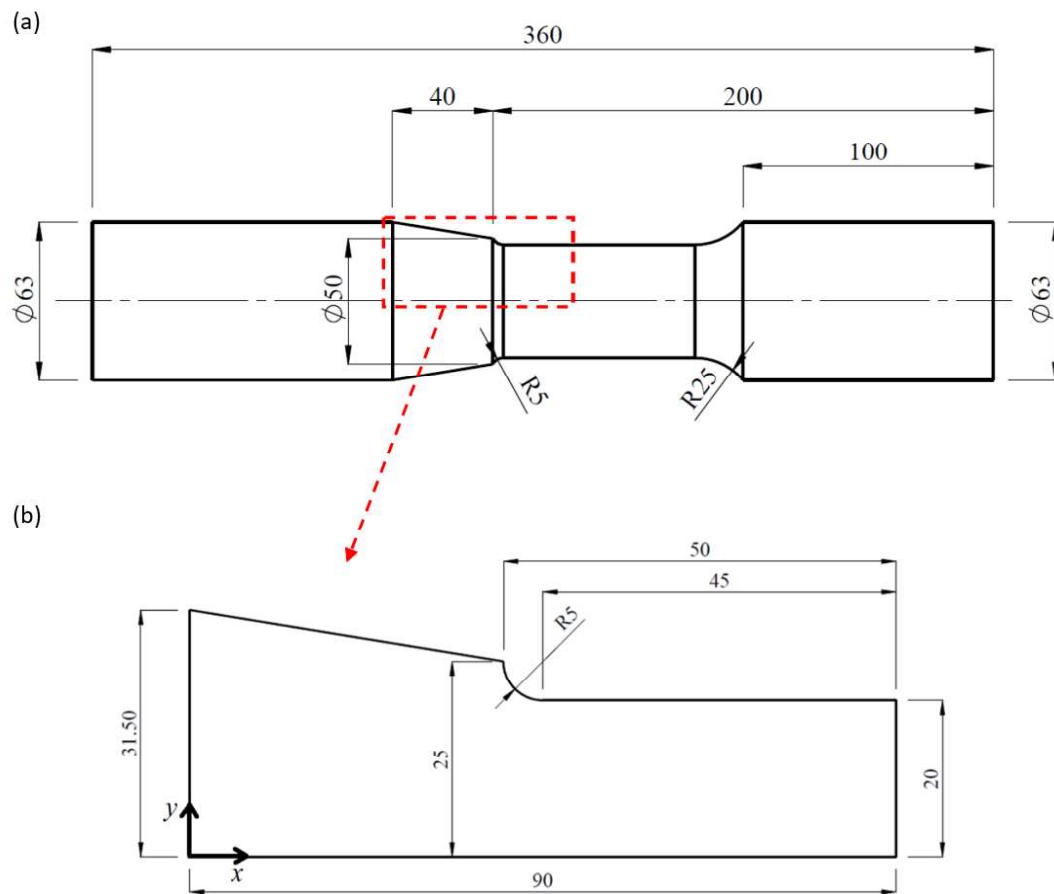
Shape and dimensions of SAE 1045 shouldered shaft specimen (a) whole body, (b) analysis domain [7]. The dimensions are in millimetres.
